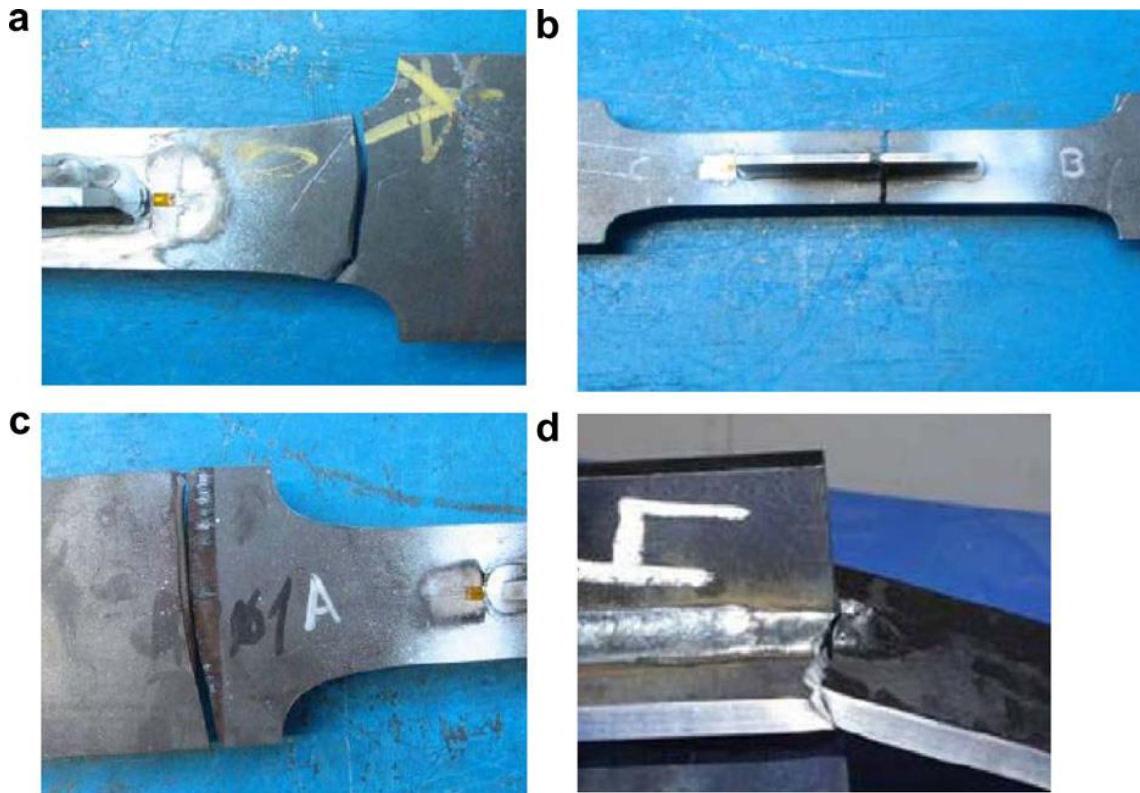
Failures observed in specimens under CA loading; (a) plate edge failure, (b) start/stop position failure, (c) fretting failure in the gripping end, (d) root side failure (Marquis [50]).
